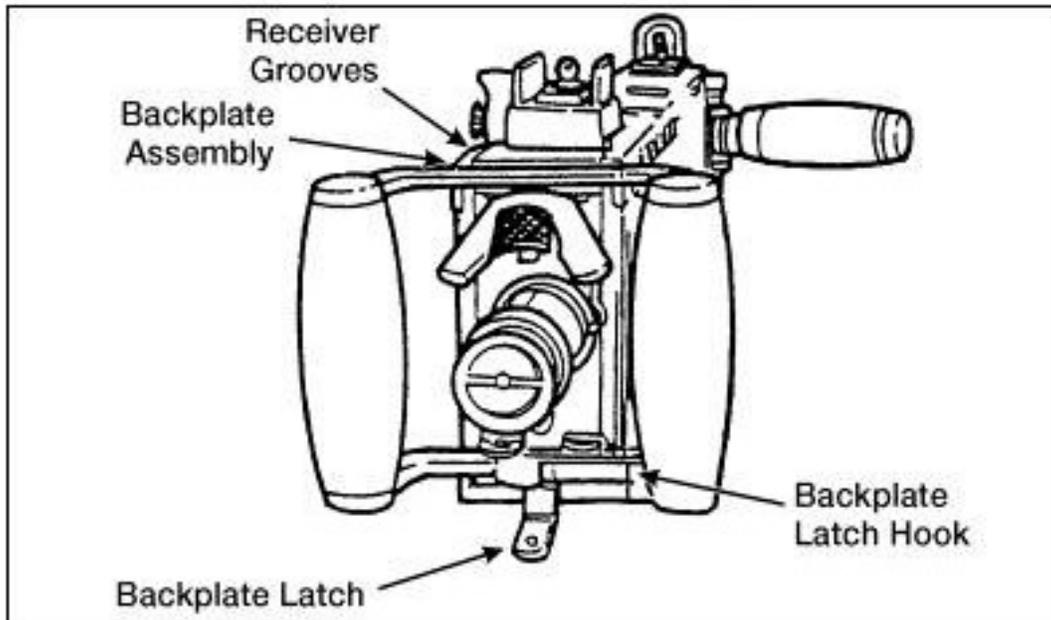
ST-1025_42 (Installation of the backplate assembly)
